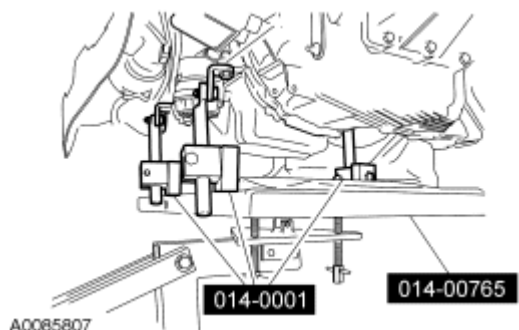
Securing Engine To Lift Table Using Special Tool (014-0001, 014-00765)
